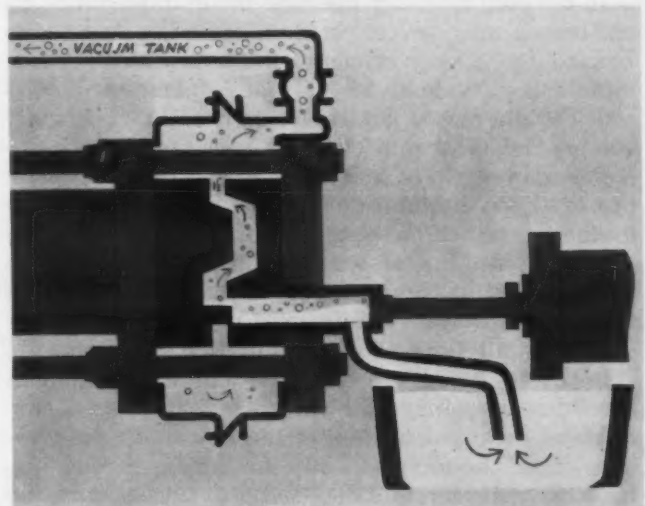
Cold chamber machine incorporates automatic feeding of metal from furnace.
